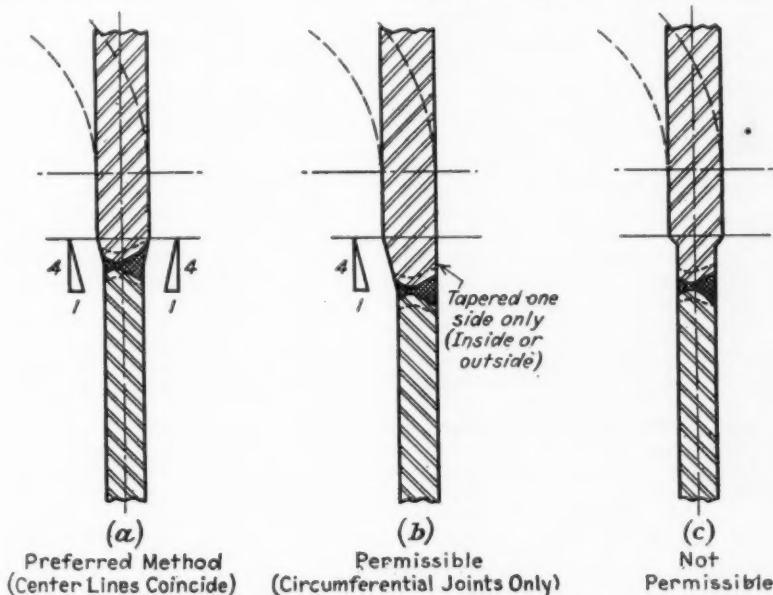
$\frac{1}{2}$  BUTT WELDING OF PLATES OF UNEQUAL THICKNESS
